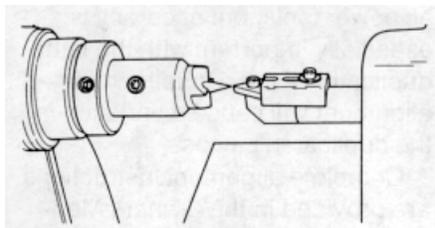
Align the tip edge of the cutter with the tip of the lathe drive center.
